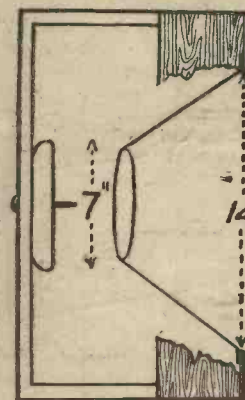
Sectional view showing larger cone cut ready to accommodate the smaller cone.
